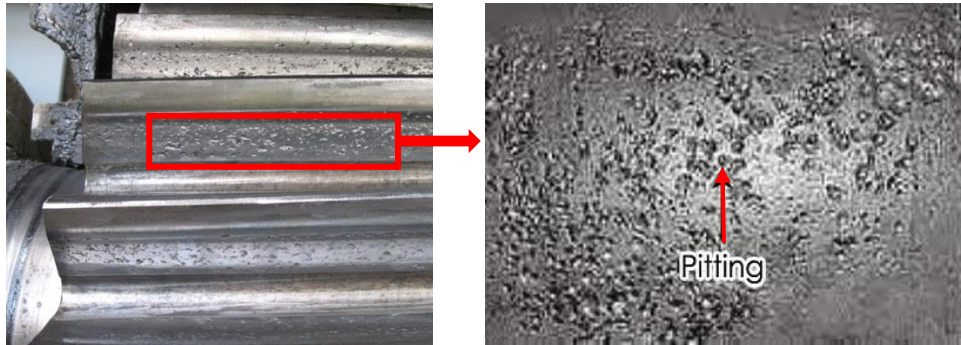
Gear surface pitting failure (Novexa.com, 2015).
